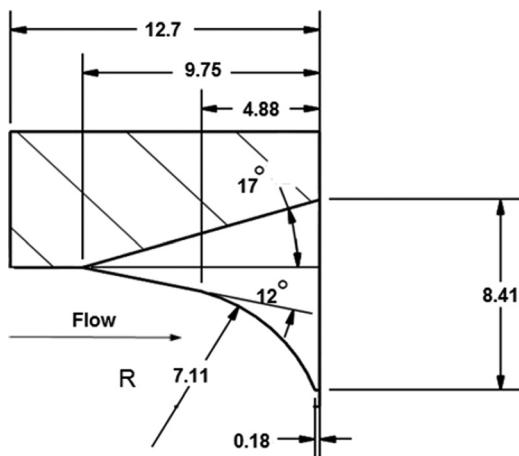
Dimensions of the curved spoiler (dimensions are in mm)
